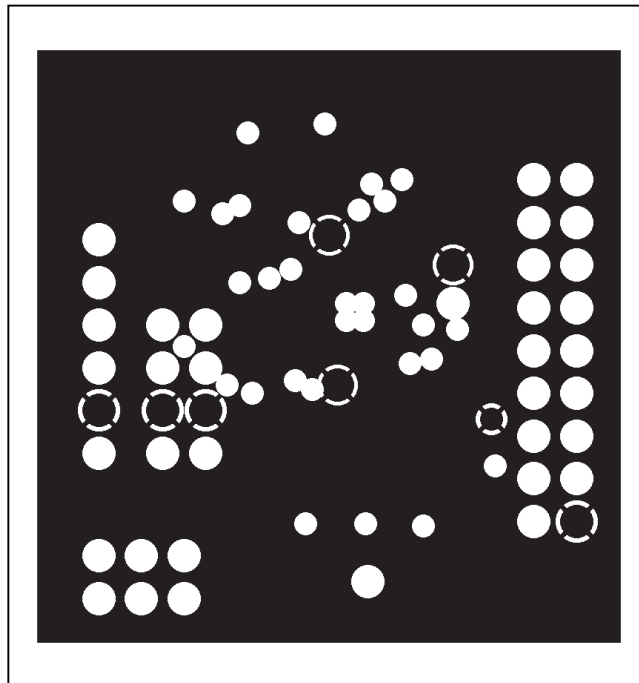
MAX7304PMB1 Peripheral Module PCB Layout—Inner Layer 1 (Ground)
